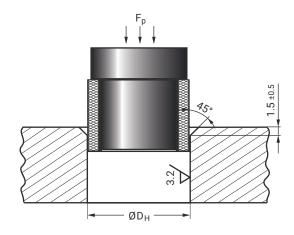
Installation of HPM / HPMB® bearings by press-fit
